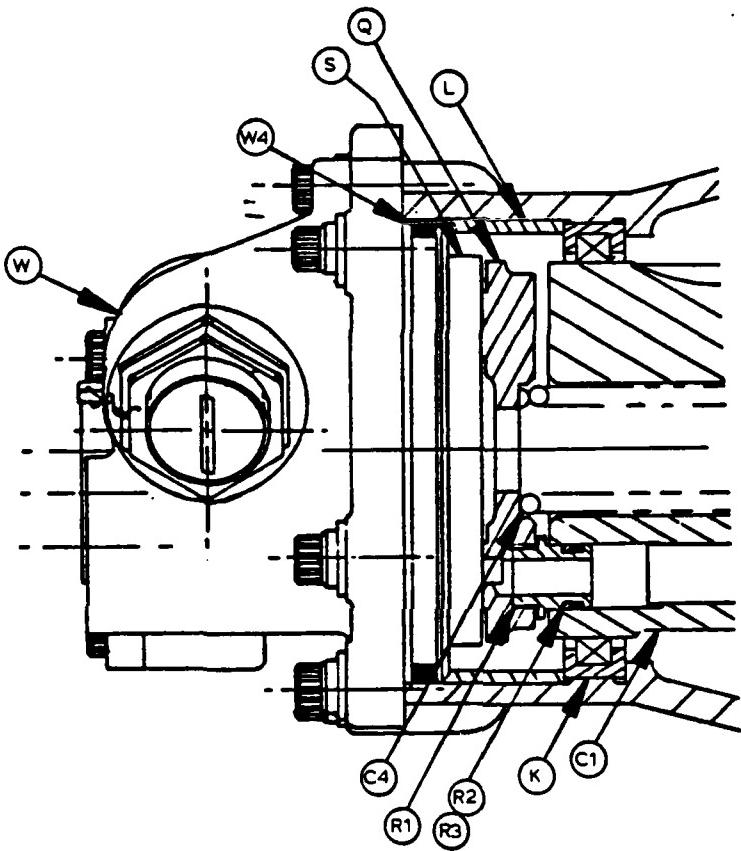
Side View ~ Showing Transfer Tubes, Cylinder Block Bearing and Valve Block Assembly
